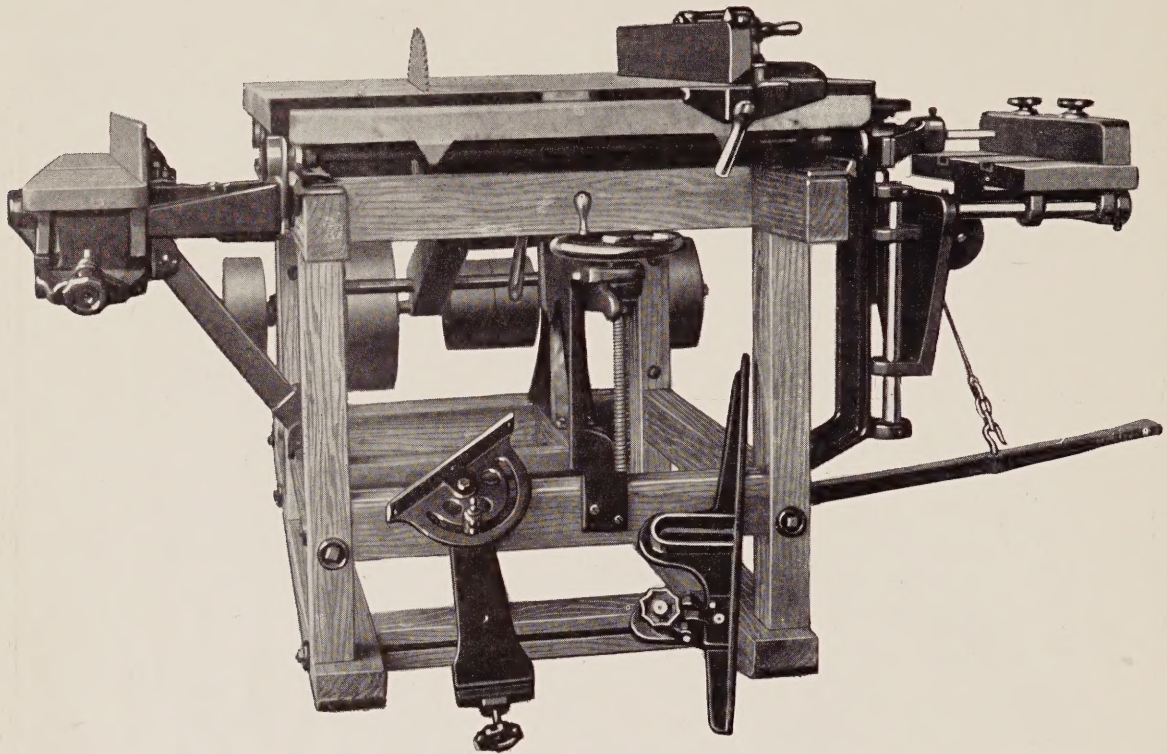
Showing arrangement for countershaft drive. Motor may be mounted direct or with short belt drive.
